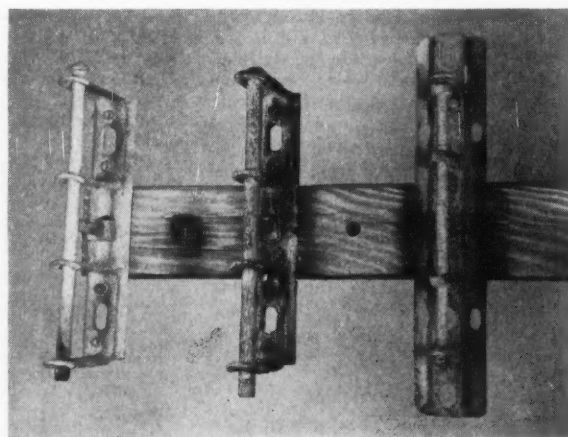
Carbon steel secondary racks after 3 years' exposure. Left to right, Process A aluminized, galvanized, Process B aluminized.
